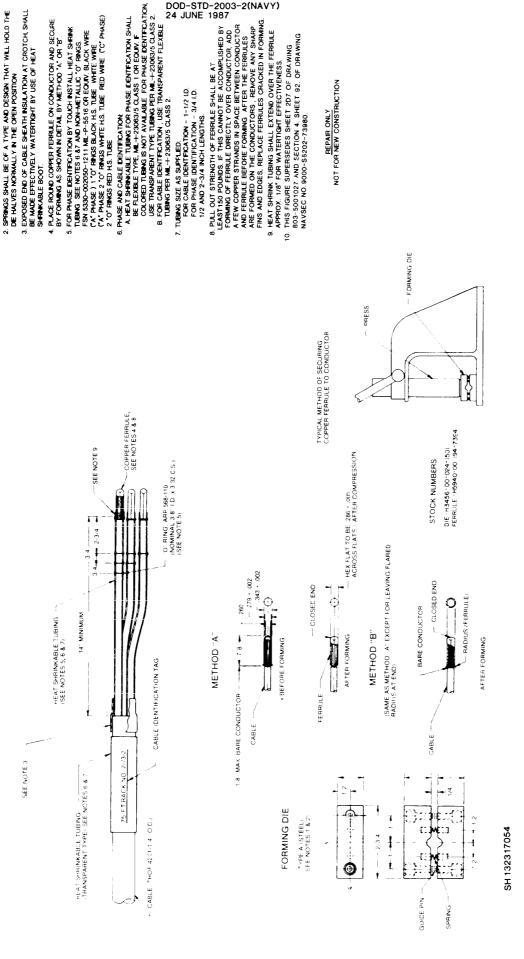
D7. Casualty power cable assembly for MIL-T-24381 equipment.
